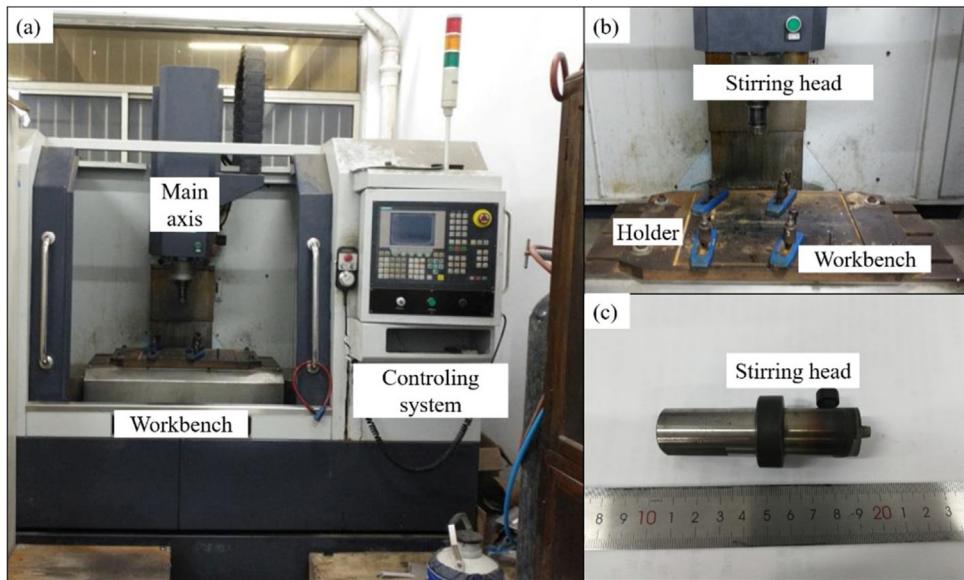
Friction stir processing machine: (a) FSP machine; (b) workbench and (c) stirring head.
